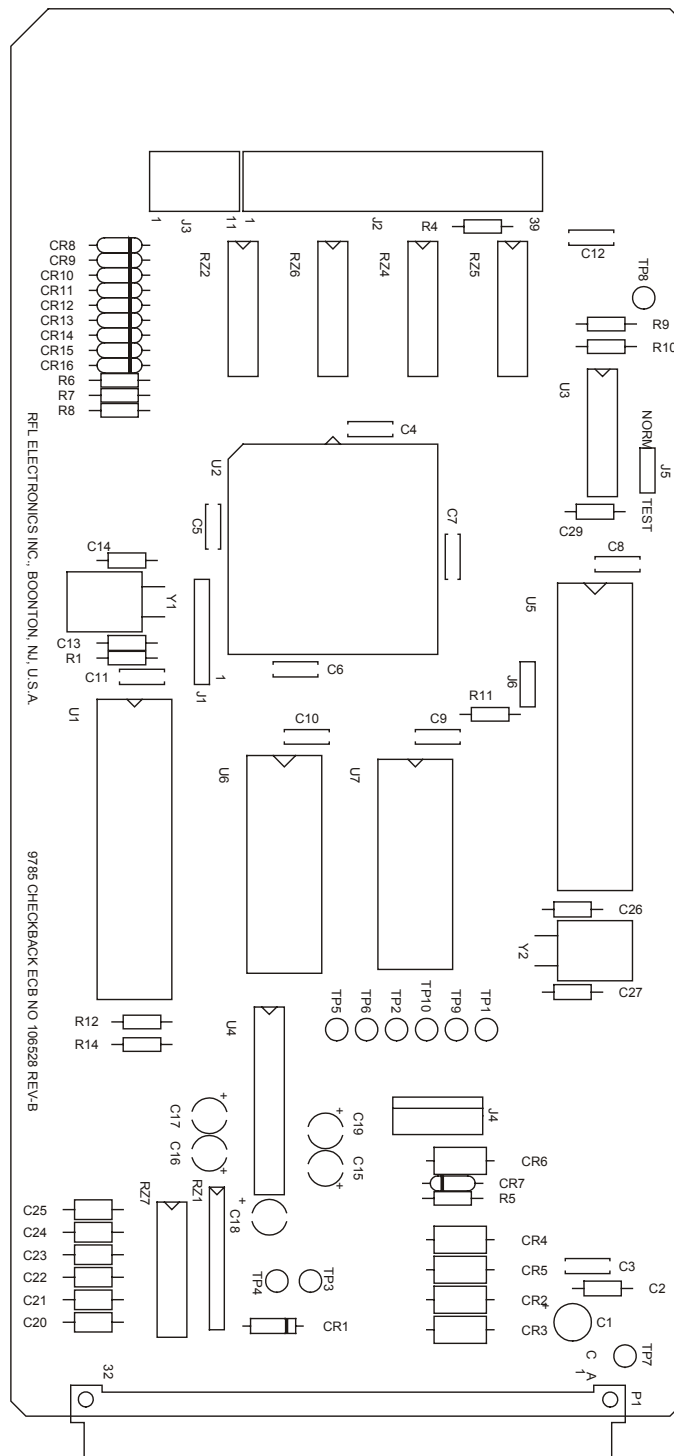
Component locator drawing, RFL 9785 Checkback module
